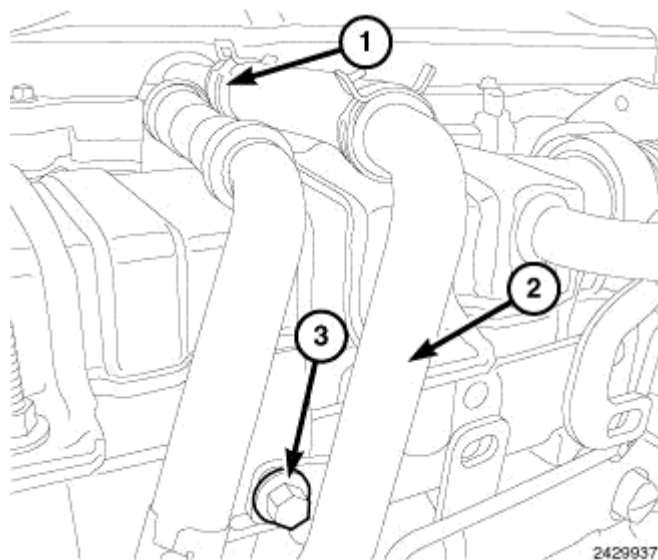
EGR Cooler, Clamp, Exhaust Transfer Manifold & Nuts
